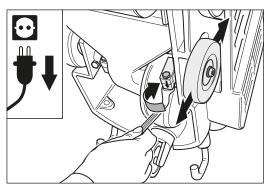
Release the screw on the right-hand wheel clamp (seen from below).
